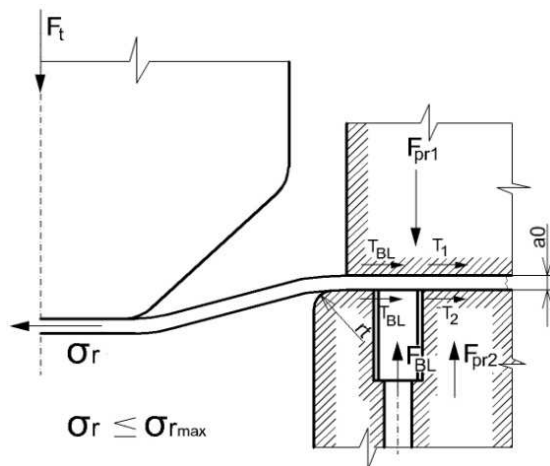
Forces on contact surfaces at deep drawing with flat restriction bars
